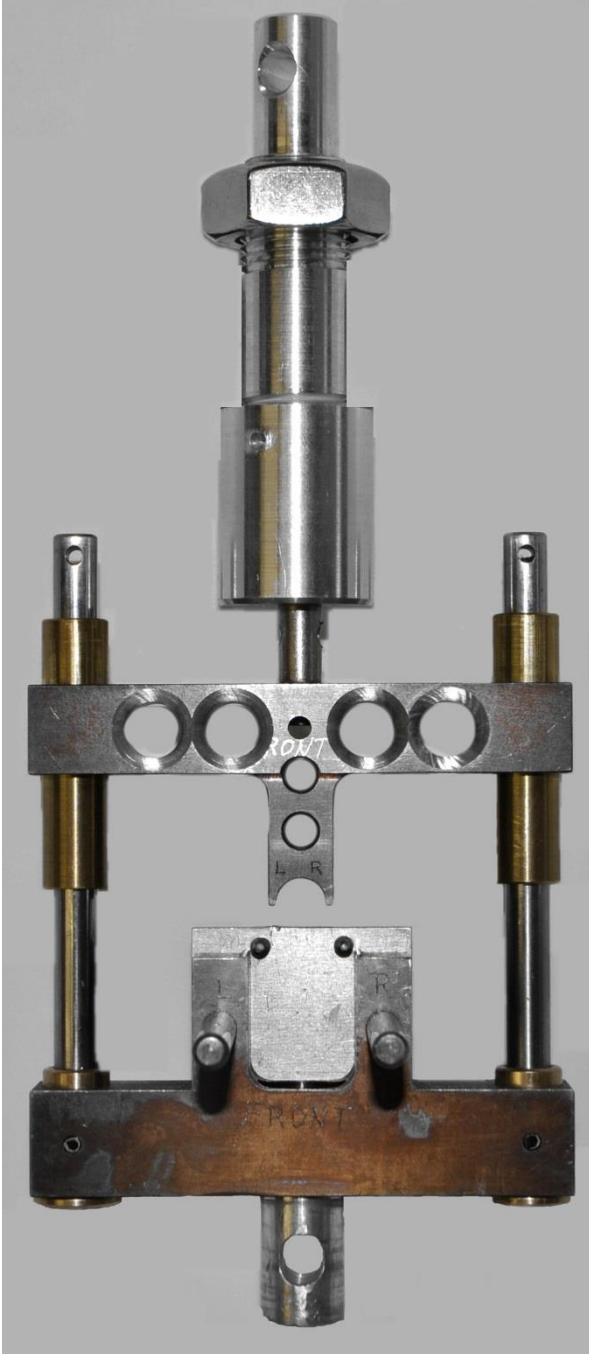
Bend test fixture used for RERTR-12 specimen tests. Top and bottom round clevis attachments are 12 mm dia.
